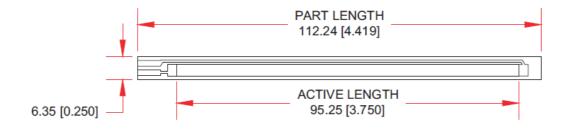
Dimensional Diagram of Bend sensor in mm[inches].
